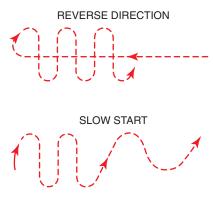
Two methods of concentrating heat at the beginning of a weld bead to aid in penetration depth.
